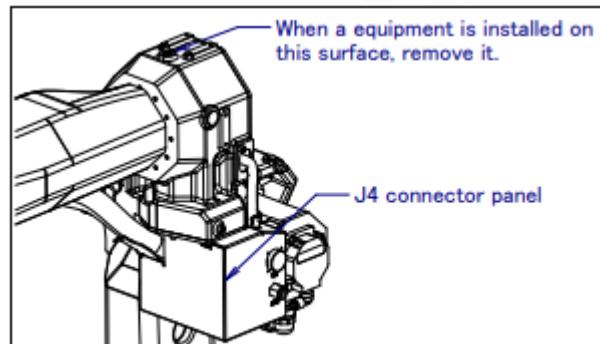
(b) Removing equipment of the ventilator hole
